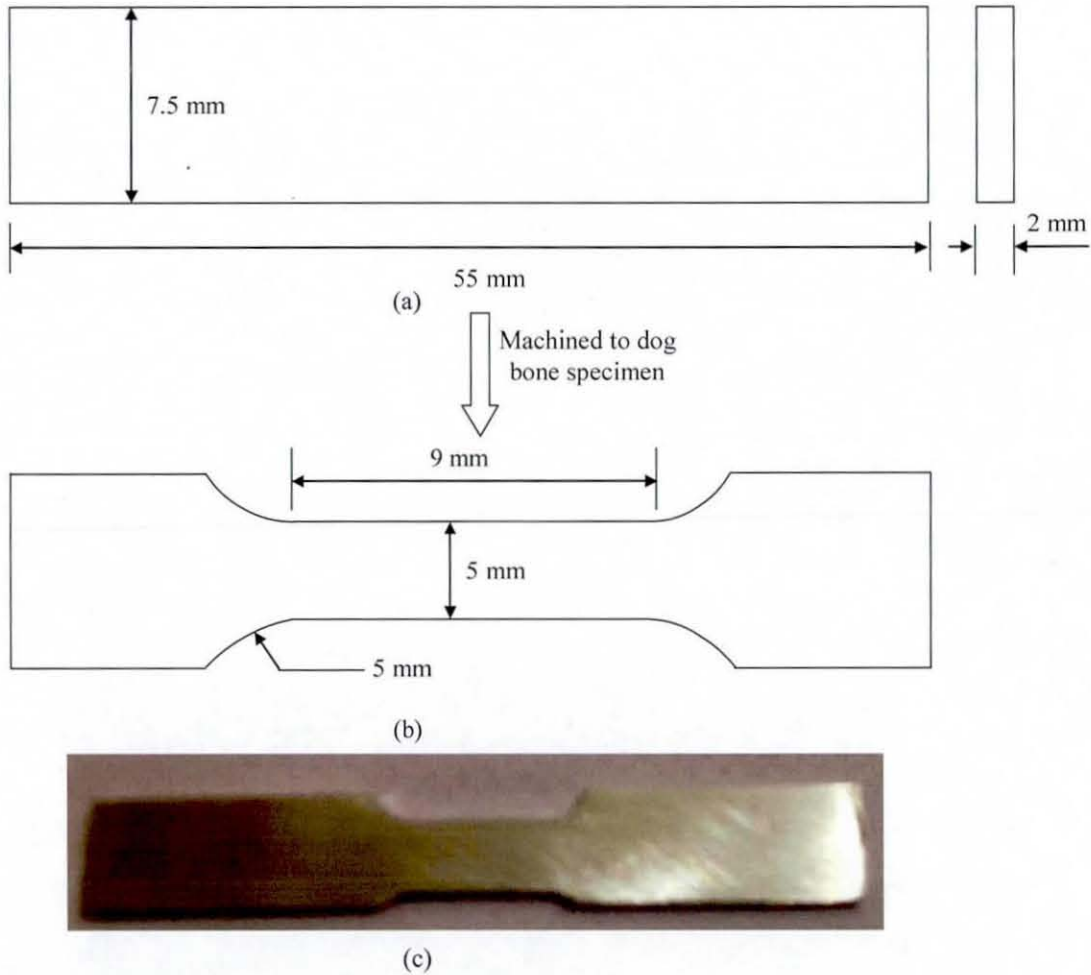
Fabrication of bulk specimen: (a) ground specimen after reflow; (b) final fabricated specimen; (c) actual specimen after final polish
